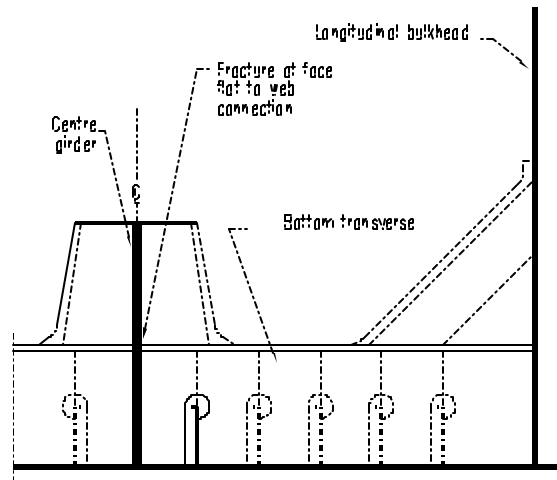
Fractured wing tank bottom transverse end bracket, asymmetrical face plate.
